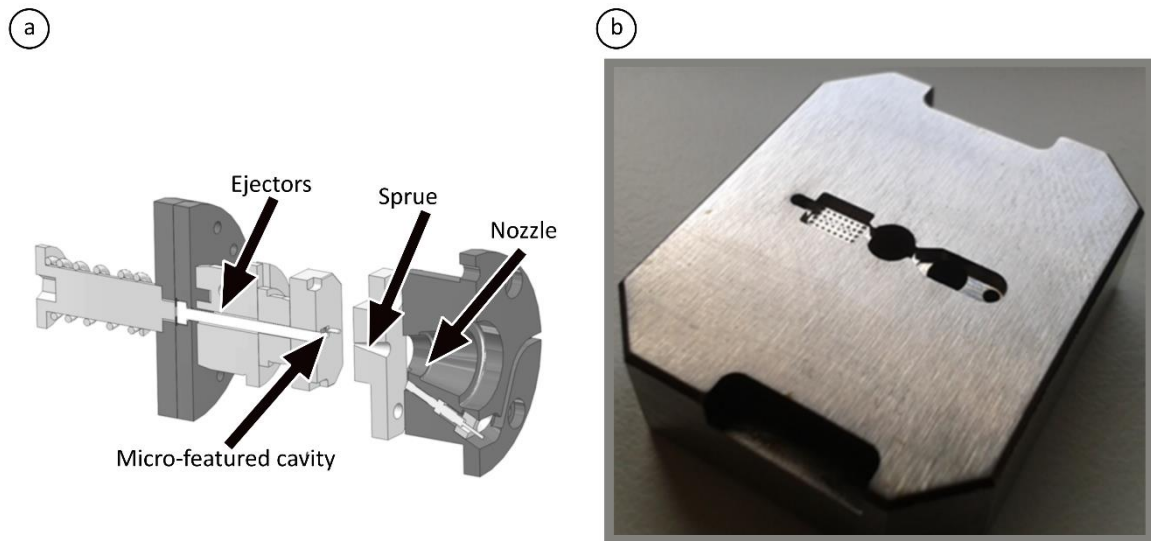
Section view of CAD design of the inserts and inner components of the mold (a). Picture of the micro-machined mold insert (b).
